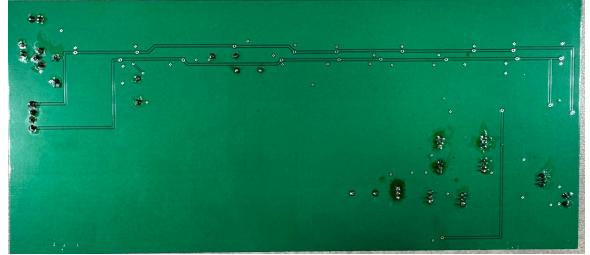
Second Receiver PCB With All Components Soldered (Back)
